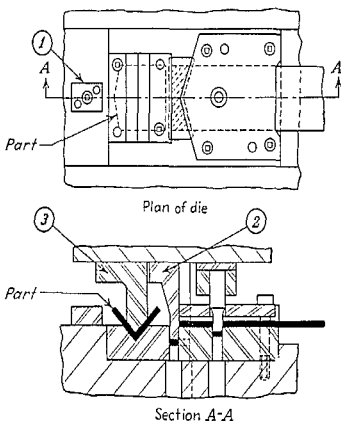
Progressive forming die with slug-type cutoff.³
